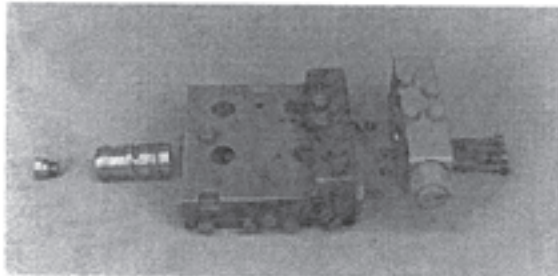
Install PCOR Defeat Spool Stop Plug
